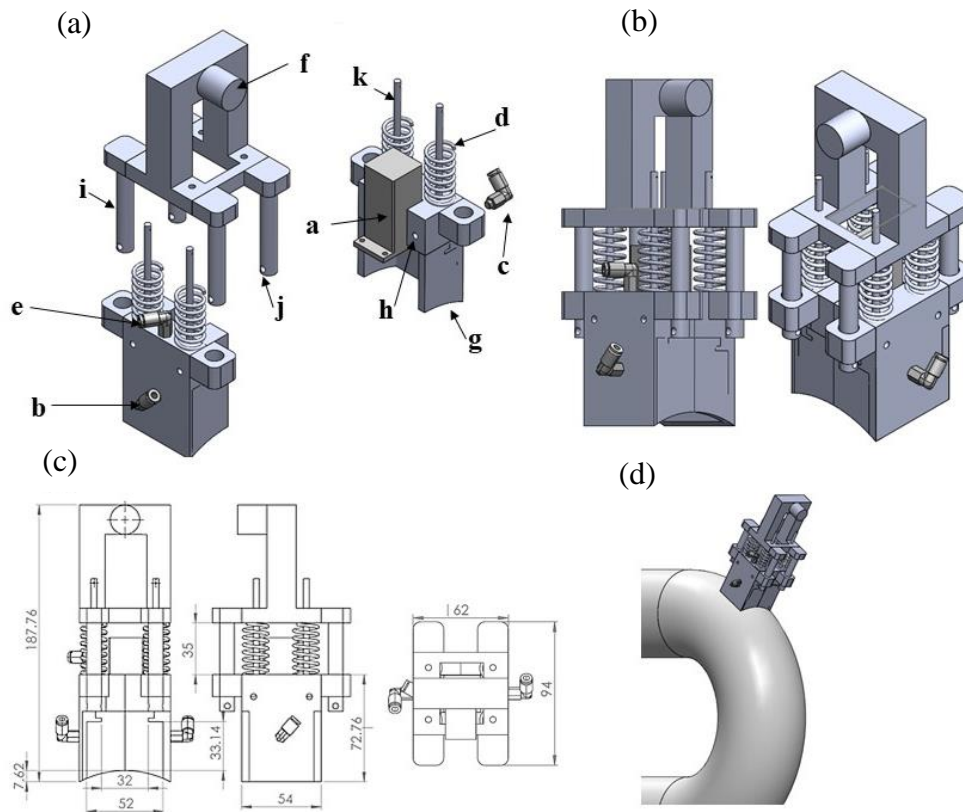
(a) Exploded view of the wedge design; (b) 3D CAD model; (c) 2D schematic; (d) probe holder placement on the chain surface
